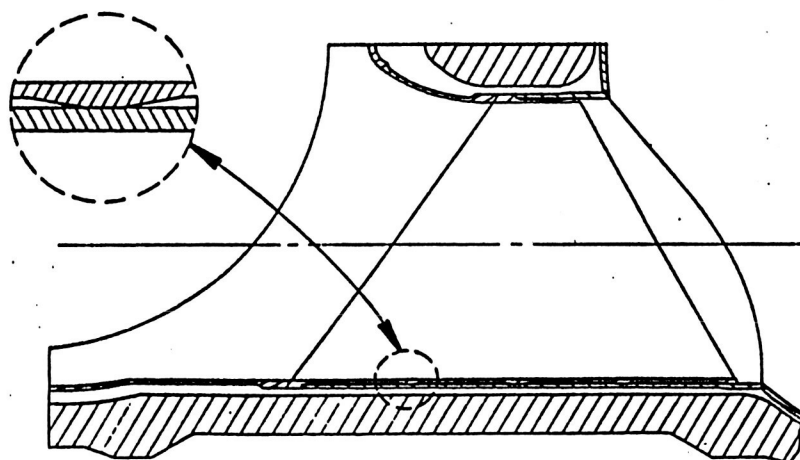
Integrally Machined Motion Limiters in the Two Duct Tube Liner Designs
